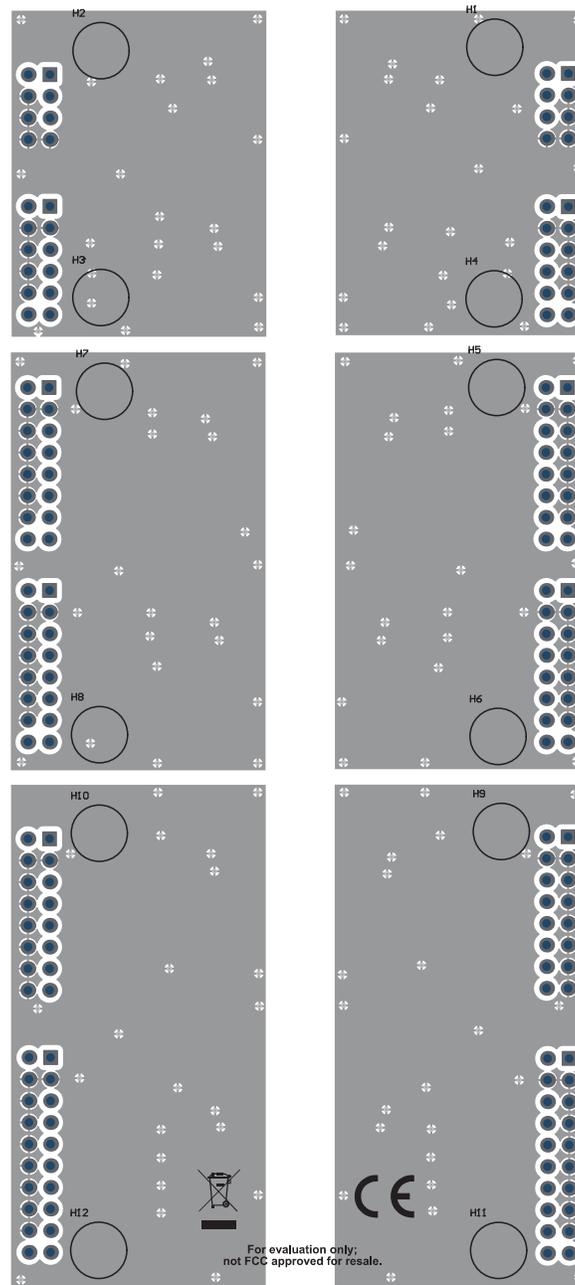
ISO64XX-WB-EVM PCB Layout - Bottom Layer
